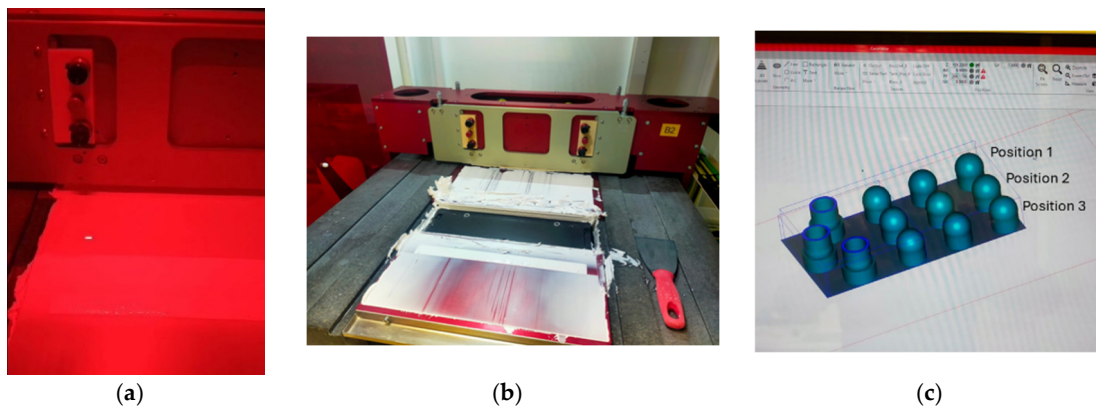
AM printer: (a) during the printing and light-curing process. (b) Printing tray after removal of the parts. (c) Spheres' layout on the AM machine display.
